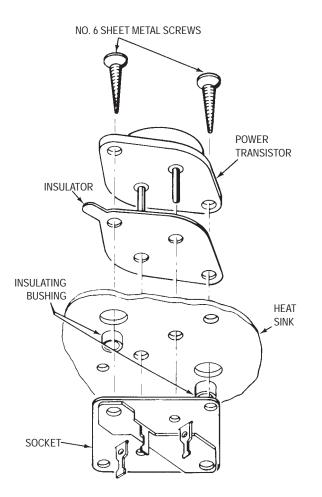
Hardware Used for a TO–204AA (TO–3) Flange Mount Part
